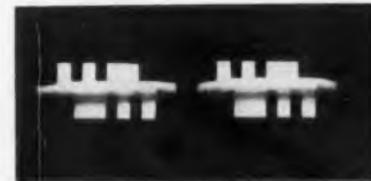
(above): Extrusion lowered the cost of this shape to 28¢ from machining's 46¢.
